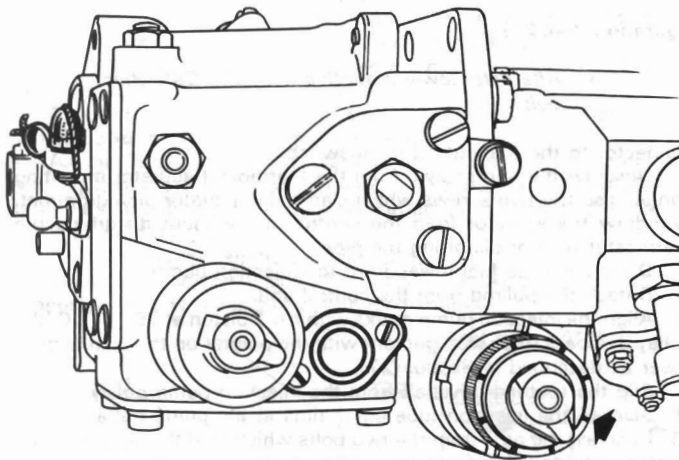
Fuel cut-off solenoid. Notch arrowed. (Sec 26)
